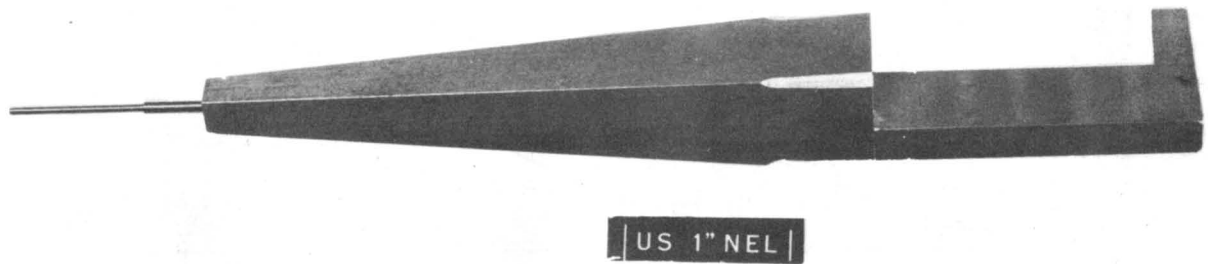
Alignment jig used in final assembly of Matrixatrons.
